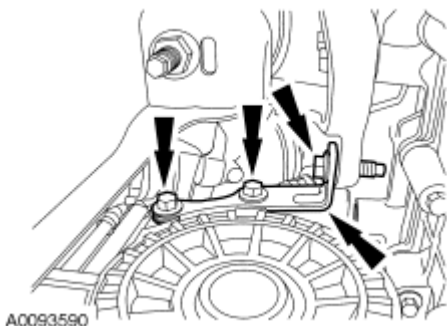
Identifying Upper PTU Bracket Bolts & Bracket
